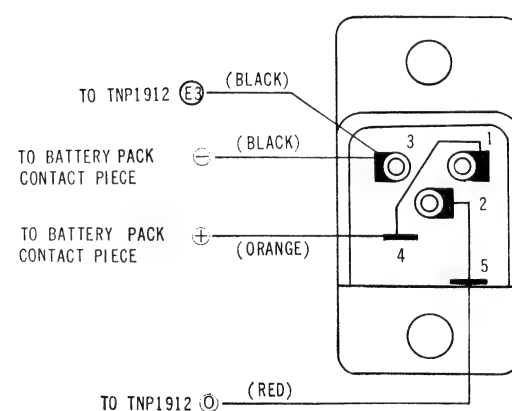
3P POWER SOCKET (REAR VIEW)
